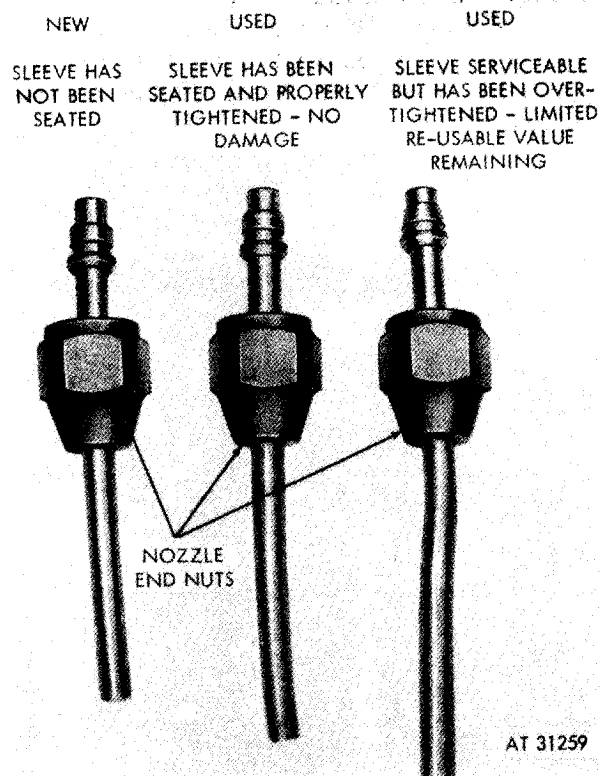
Comparison of serviceable sleeves-injector nozzle tube ends.
